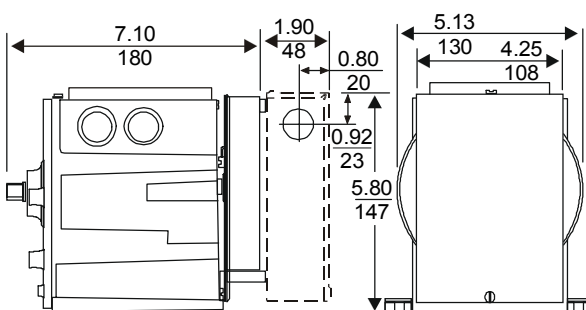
Spring Return with Switch Kit Dimensions, in. (mm)
